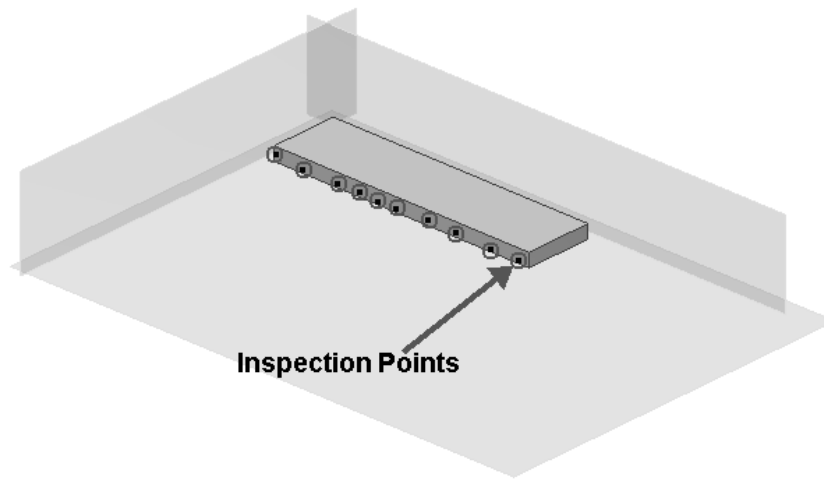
CMM inspection points in Autodesk Inventor.
